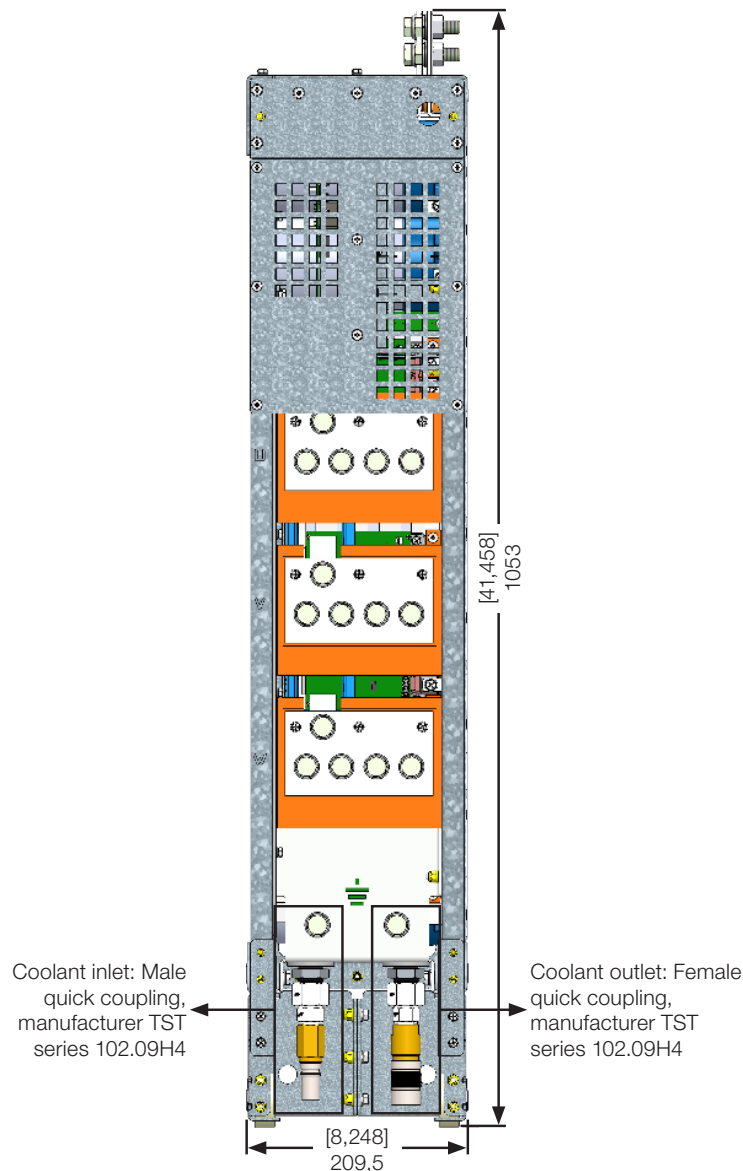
UP11W with the coolant inlet and outlet fittings of the quick coupling type. Dimensions in mm [pol]
